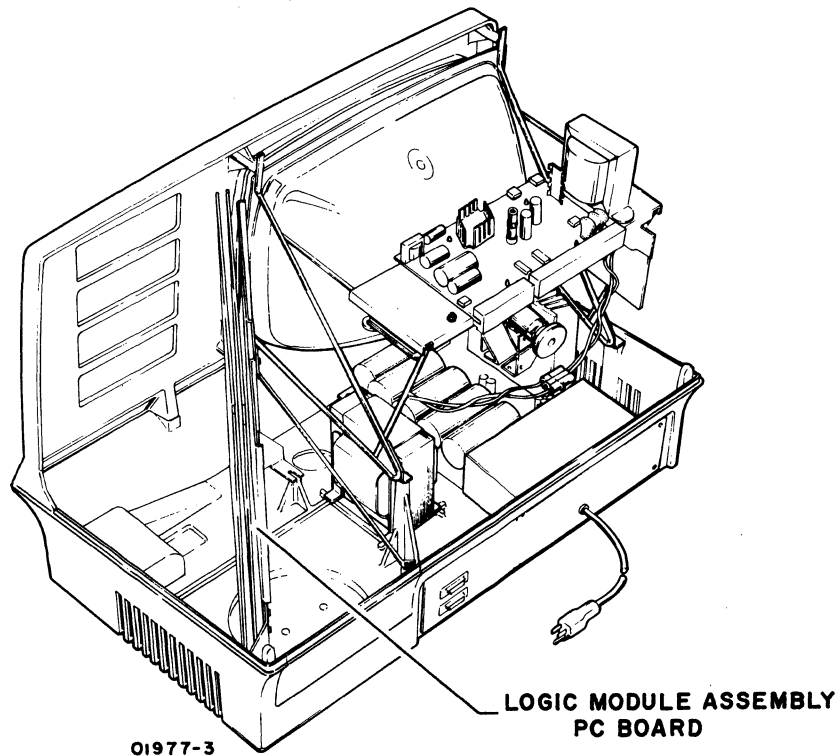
Location of Logic Module Assembly PC Board in Display Terminal
